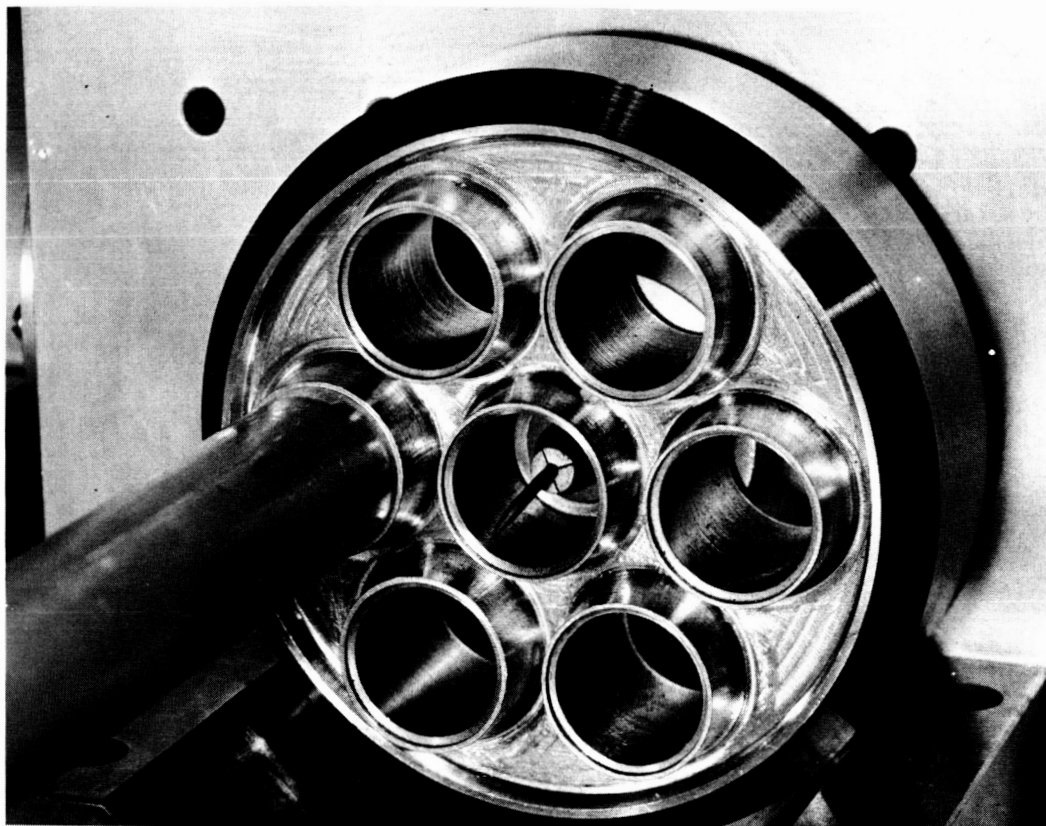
View of seven tube header with internal rotating tungsten electrode shown in center tube boss.
